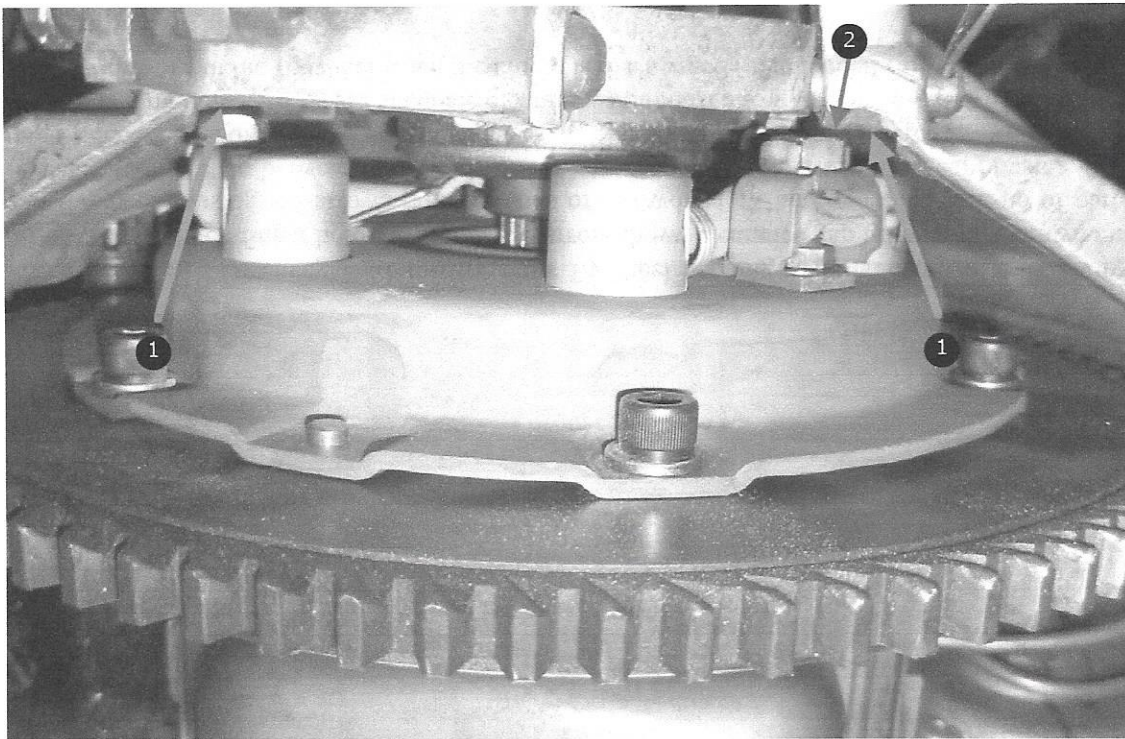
Clutch Engaged #1 arrows show flywheel housing material removal area giving clearance for clutch finger hold down nuts. #2 arrow shows clearance gap between hold down nut and flywheel housing. Note the slightly increased clearance gap with clutch engaged (compared to Photo #3).
